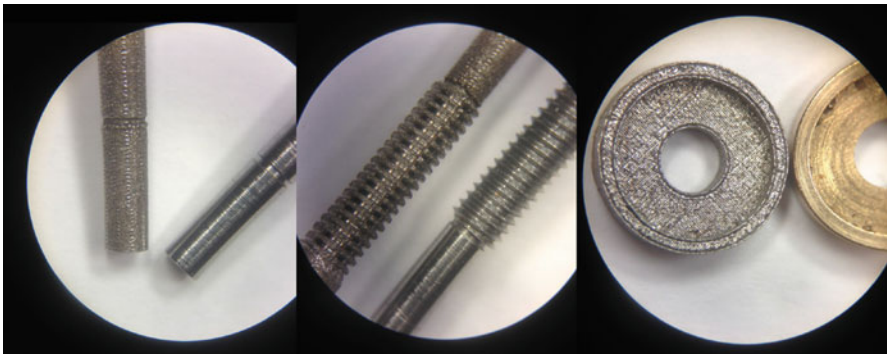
Comparison of the printed shafts and the parts produced on (CNC) lathe
